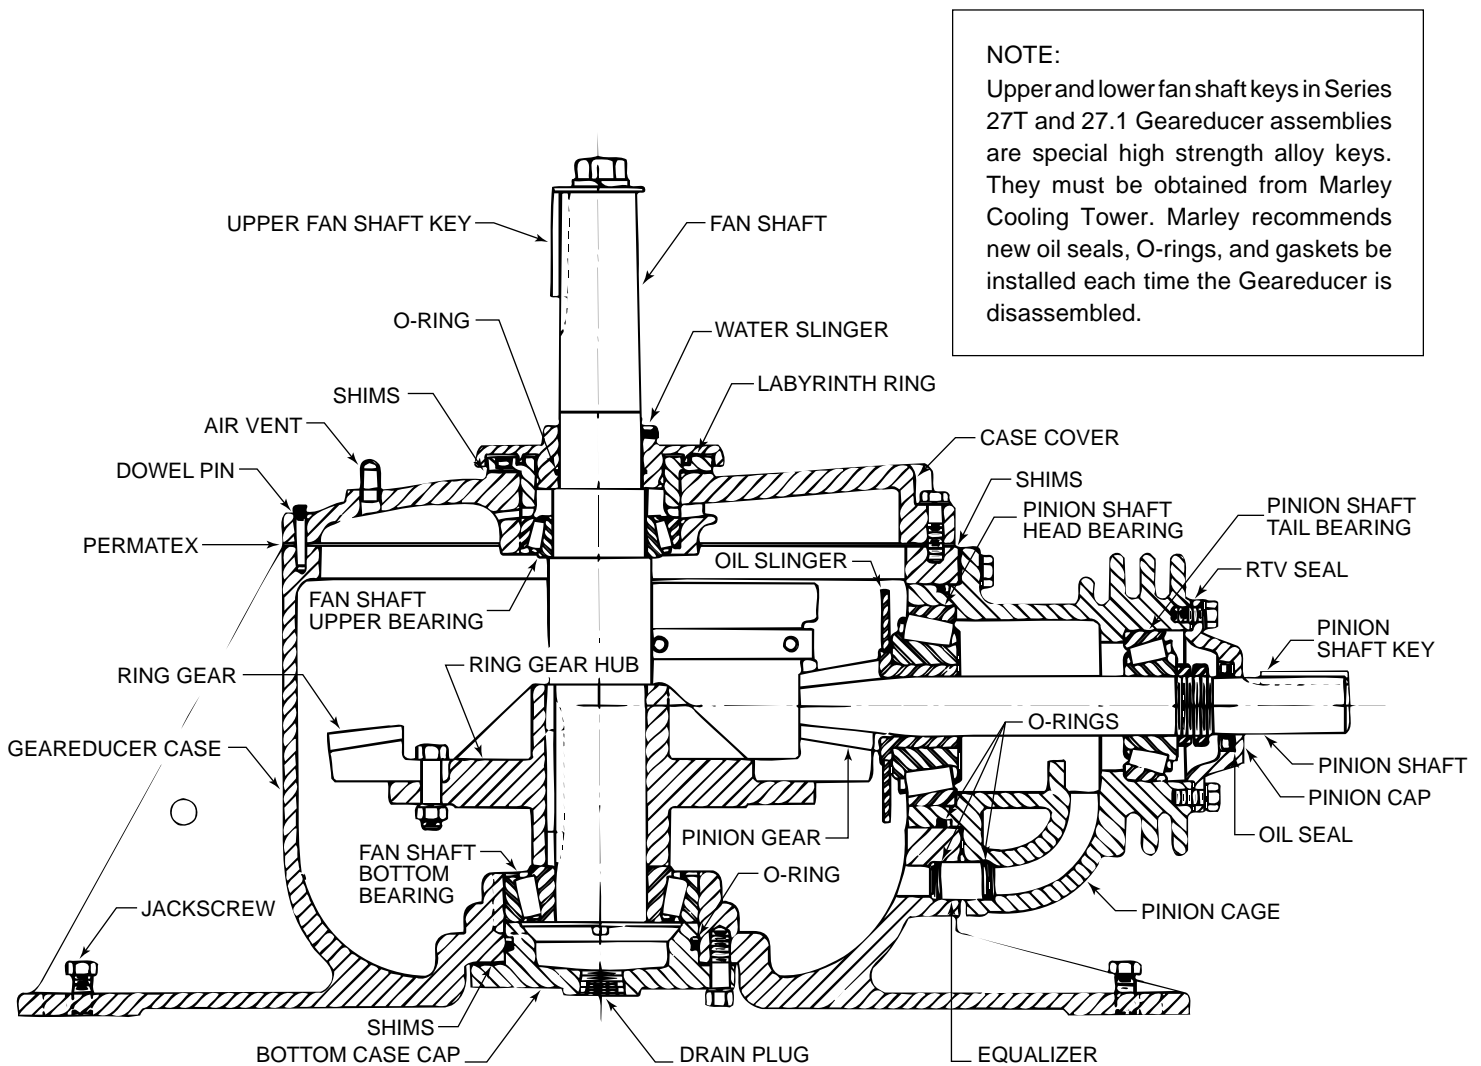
Cross Section Series 27A, 27T, and 27.1 Geareducer with Labyrinth Fan Shaft Seal
